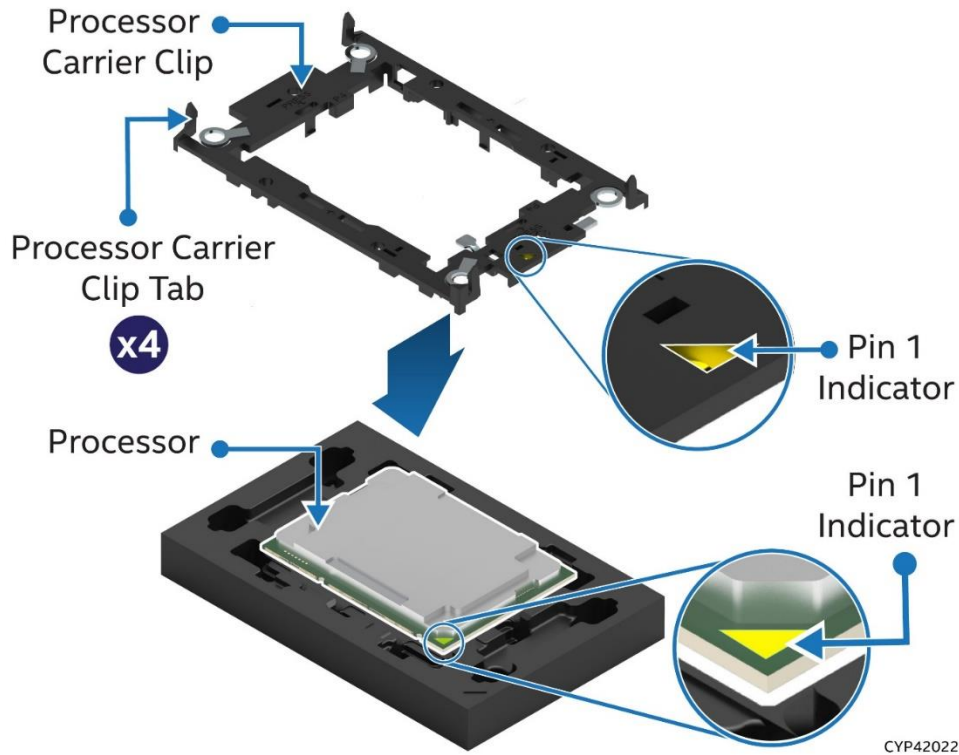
Installing the Processor Carrier Clip onto the Processor – Part 1
